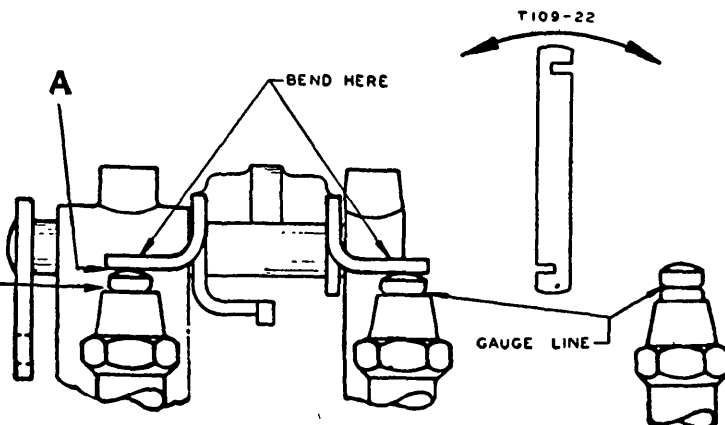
CARTER WDO. Anti-pollution setting. See Carter table and text for details
